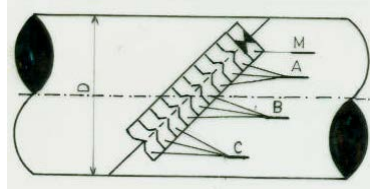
Sketch illustrating the orientations of the Charpy V-notch test specimens
